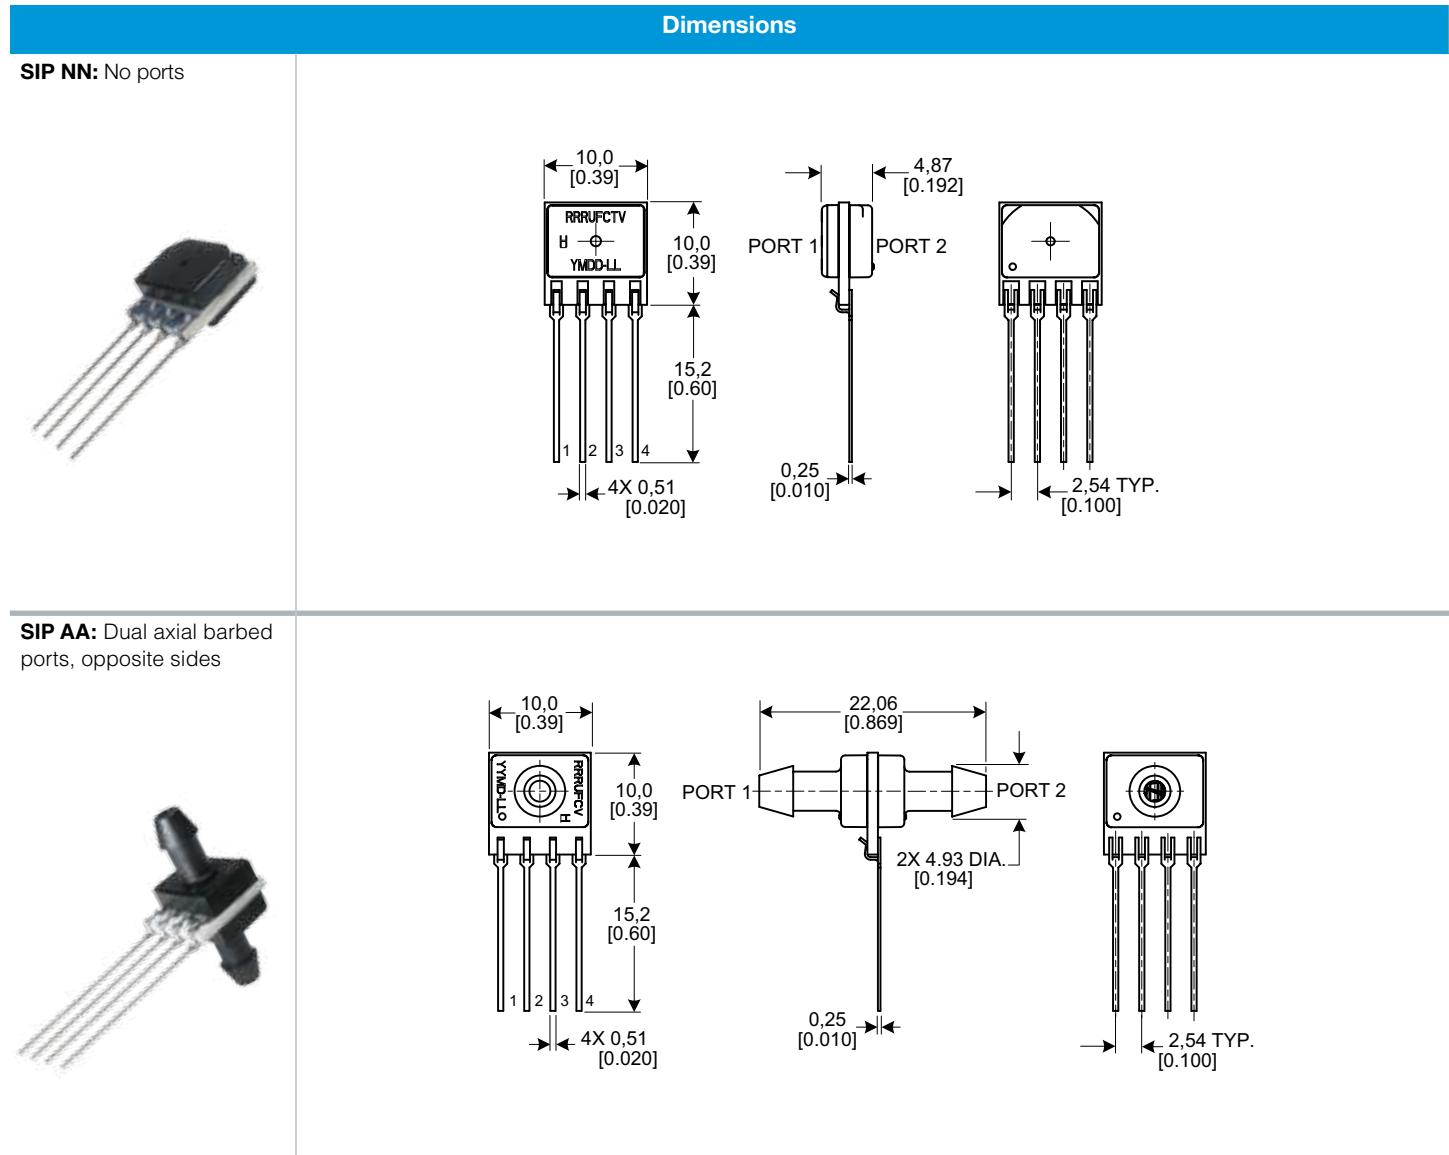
SIP Package Dimensional Drawings (For reference only: mm [in].)
